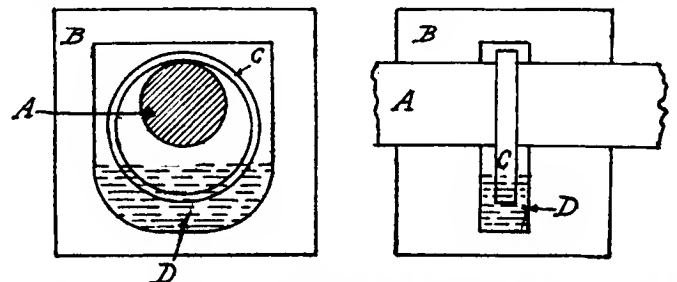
Principle of oil ring. A, shaft; B, bearing; C, oil ring; D, oil. The oil chain is very similar, the flexible links conforming to the contour of the shaft for the upper half of its circumference.
